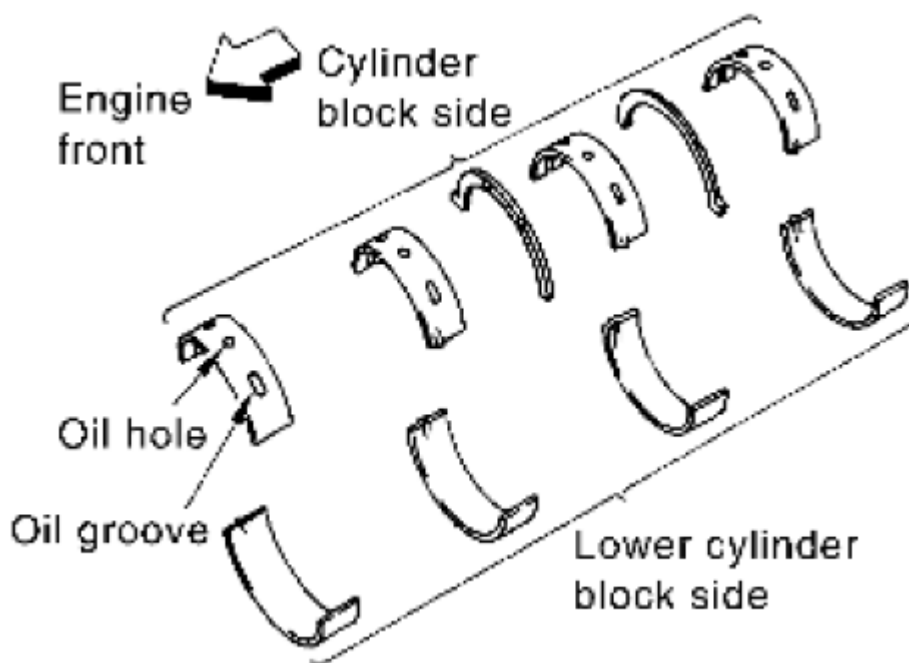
Identifying Main Bearings Oil Hole And Oil Groves
